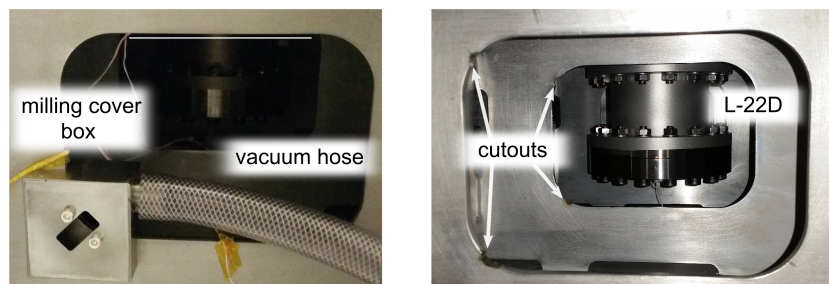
Left: Cover box with attached vacuum hose to suck in all metal chips produced by milling. Right: Milling results with four cutouts at the lower and upper left corner of both holes inside the honey-comb structure. The L-22D is still installed inside the optical table.
